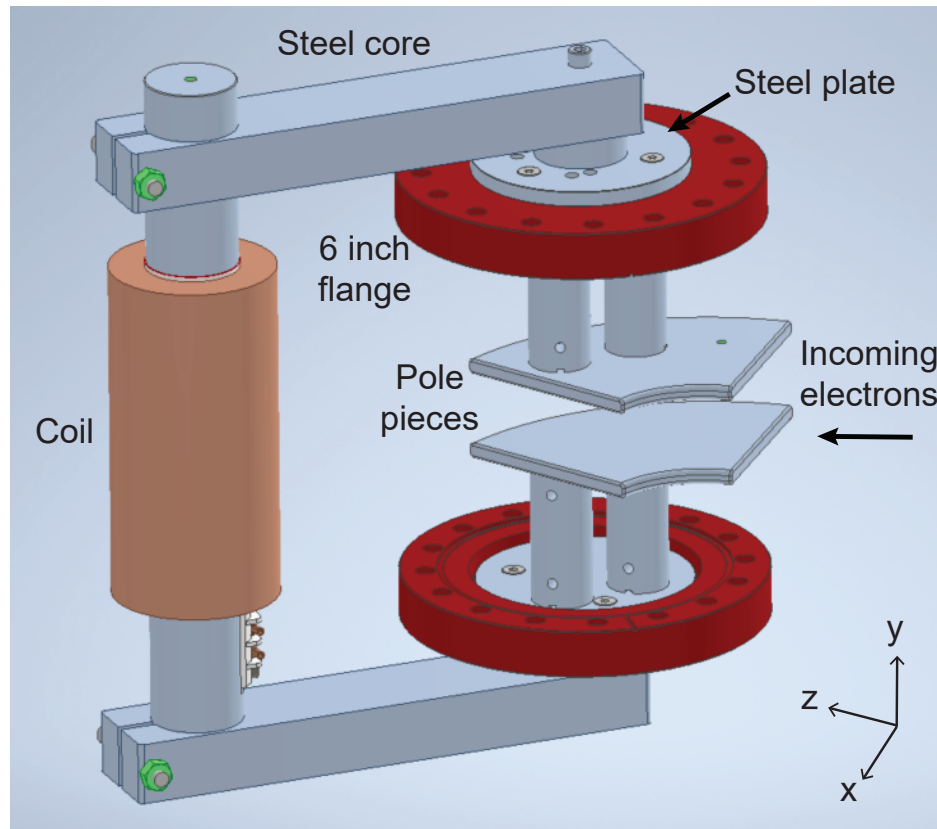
Model of the dipole magnet for the spectrometer assembly. The magnet consists of a coil around a steel core. The dipole is mounted on 6 inch conflat flanges. Inside vacuum there are nickel-plated steel pole pieces. The electrons enter the gap along the z axis and are bent towards x . The field for spreading the beam towards the spectrometer detector points in the positive y direction.
